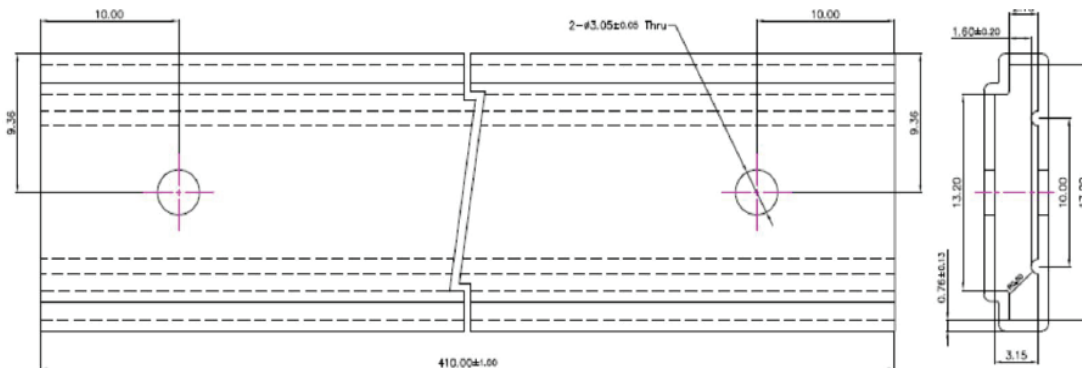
Tube dimensions for L2C5-xxxx1202x090x, L2C5-xxxx1203x090x and L2C5-xxxx1204x090x
